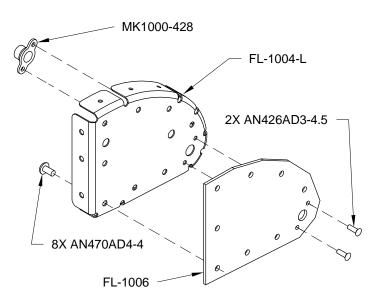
RIVET OUTBOARD ROD END RIB SUBASSEMBLY
